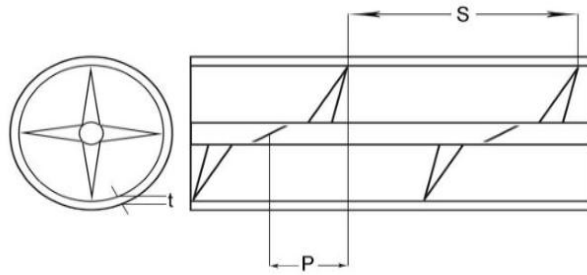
Arrangement of Pipe with Triangular Fin Insert in Test Section
